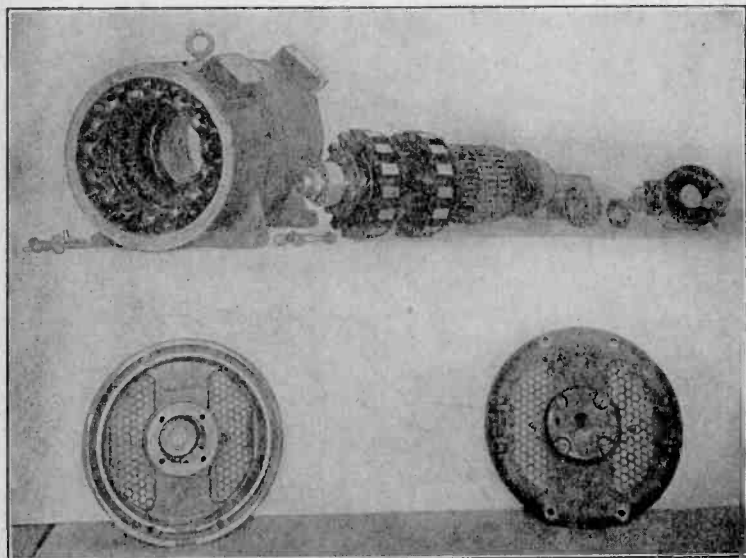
Exploded View of Crocker-Wheeler 2 KW. Motor Generator with Inductor Type of Alternator.
